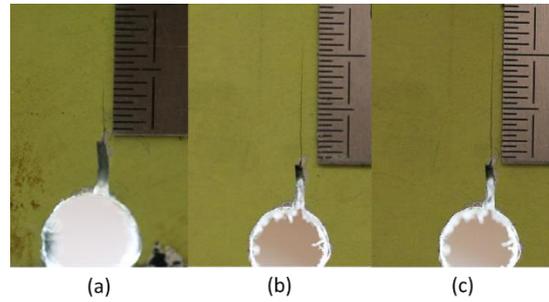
Imaged of the crack in the notch before test 1 (a), before test 15 (b) and after test 15 (c)
